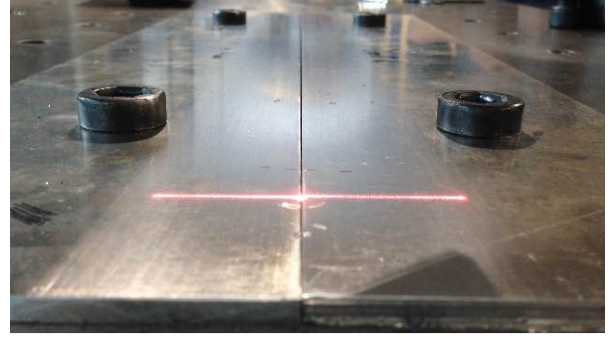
Work-piece with straight seam prior to welding. Also visible is the laser beam for seam tracking.
